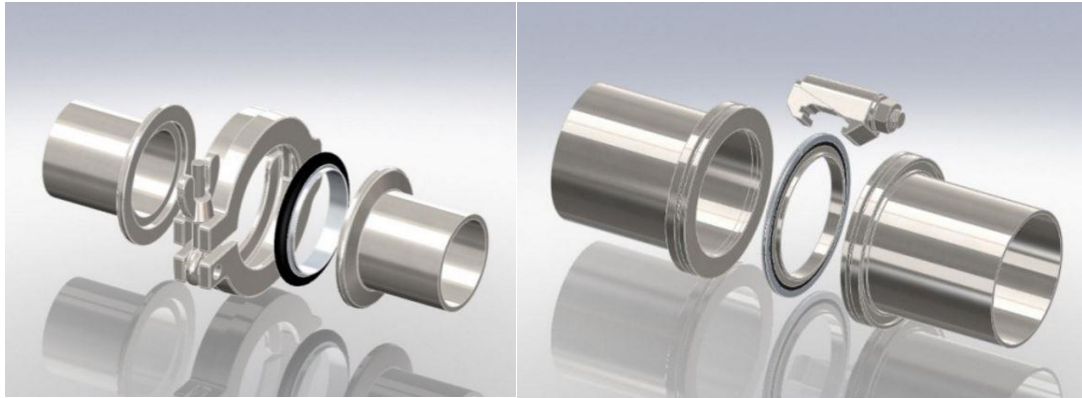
Klein Flange – KF (left) and ISO-K flange (right) (www.hositrad.com)
